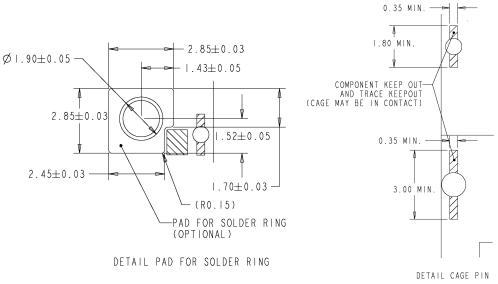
Details of pad for solder ring (left) and cage pin keepout (right)
